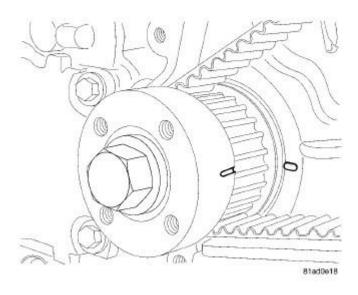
Crankshaft Timing Marks Courtesy of CHRYSLER LLC
